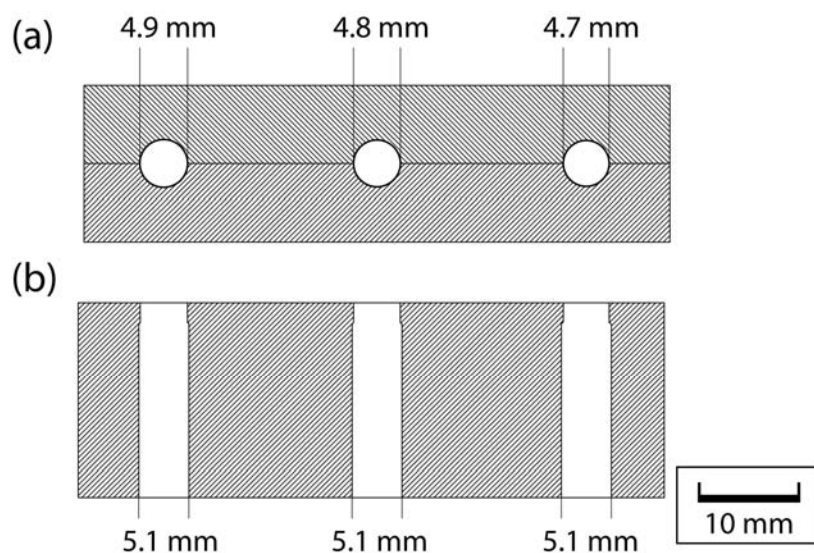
Drawing of the hardened steel die used for welding 5.0 mm O.D. 4.4 mm I.D. capsules. (a) top view of the two pieces of the die. (b) side view of one of the pieces. Note the narrowing of the bore diameter in the uppermost 2 mm of the die.
